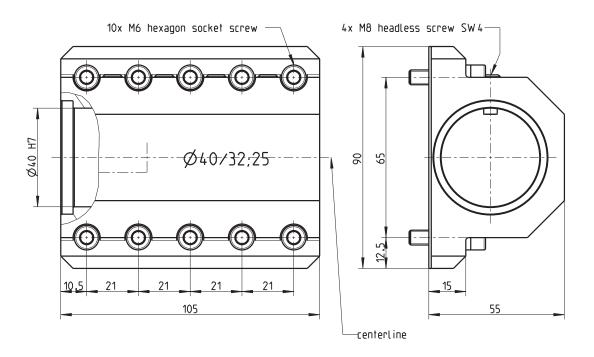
Tool holder for lathe chisel for axially mounted dynamometer, Type 9129AE...
